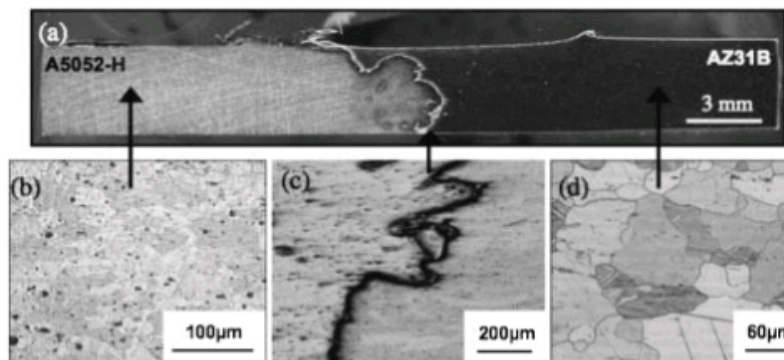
Macroscopic (a) and microscopic image (b)–(d) of the cross section welded at 1000 [per min] and 200 [mm/min].
